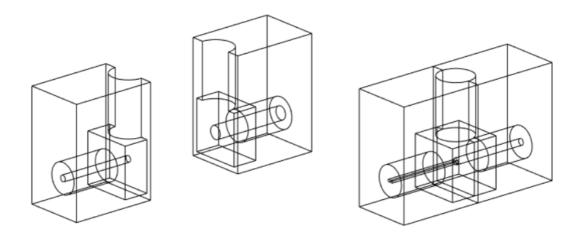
Wireframe schematic of the 3D printed mould assembly. Two mould components (left images) are mated and held together by rubber bands (right image), and resin is injected through the hole at the top.
